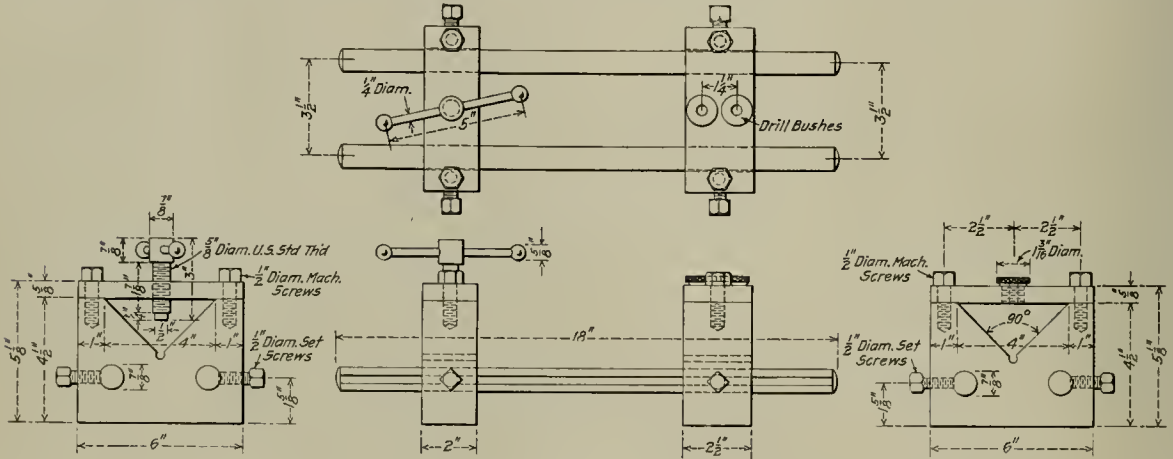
Drilling Jig for Drilling Holes in Coupler Pins
